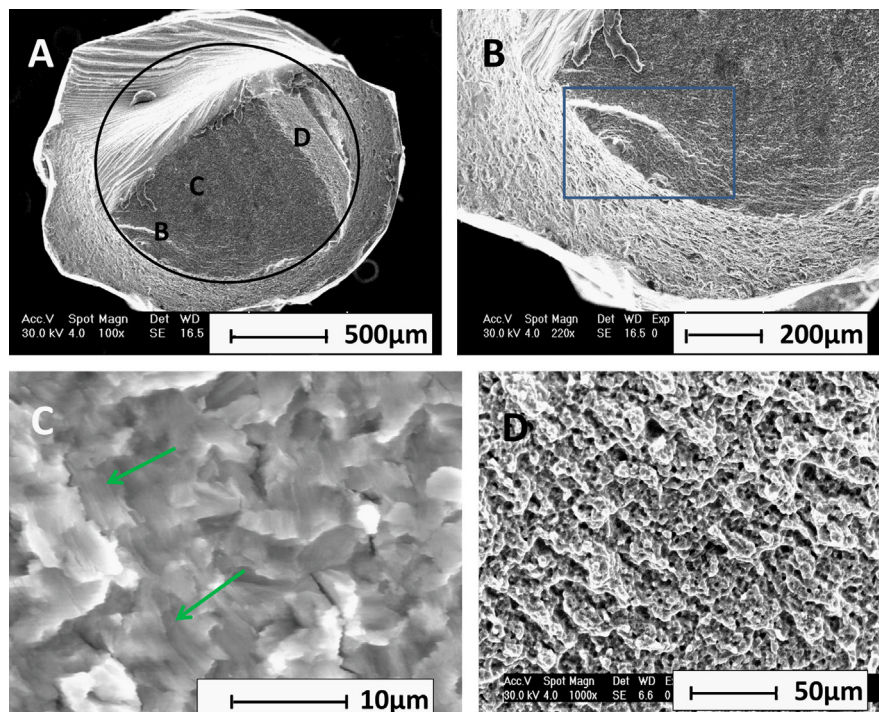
Failure analysis of retrieved fractured Ti-6Al-4V dental implants with representative fractographs A: The fracture surface marked by round circle. The letters on the fracture surface are the locations on the fracture surface of fractographs B, C and D. B: fractograph of crack initiation location (Blue square) (X220). C: fractograph of fatigue crack propagation: fatigue striations are marked by green arrows (8 K) on the flat part. D: final failure markings, dimples on the rough part. (For interpretation of the references to color in this figure legend, the reader is referred to the web version of this article).
